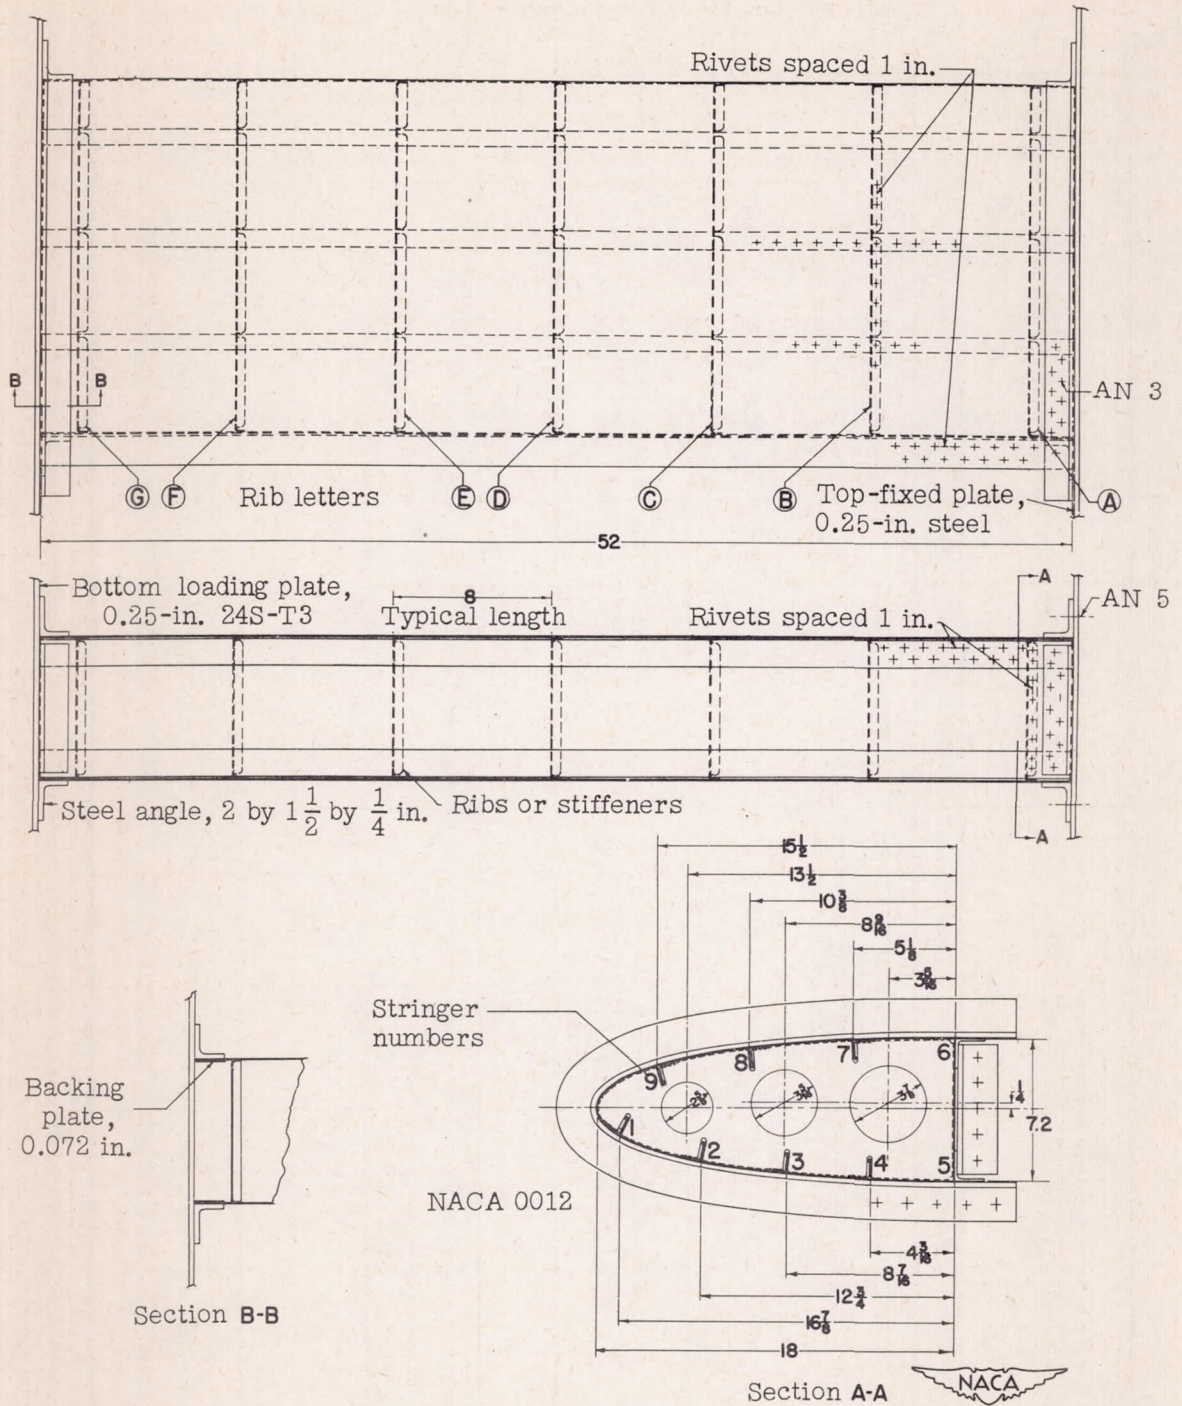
Details of specimen 48; dimensions given in inches. Other specimens similar except for number of ribs and stringers. Dimensions vary with specimen; see table I.
